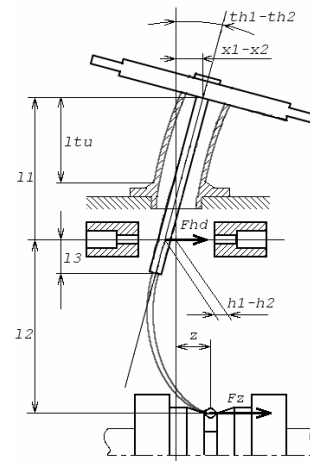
Scheme of mechanical parts of an electro-hydraulic servovalve
